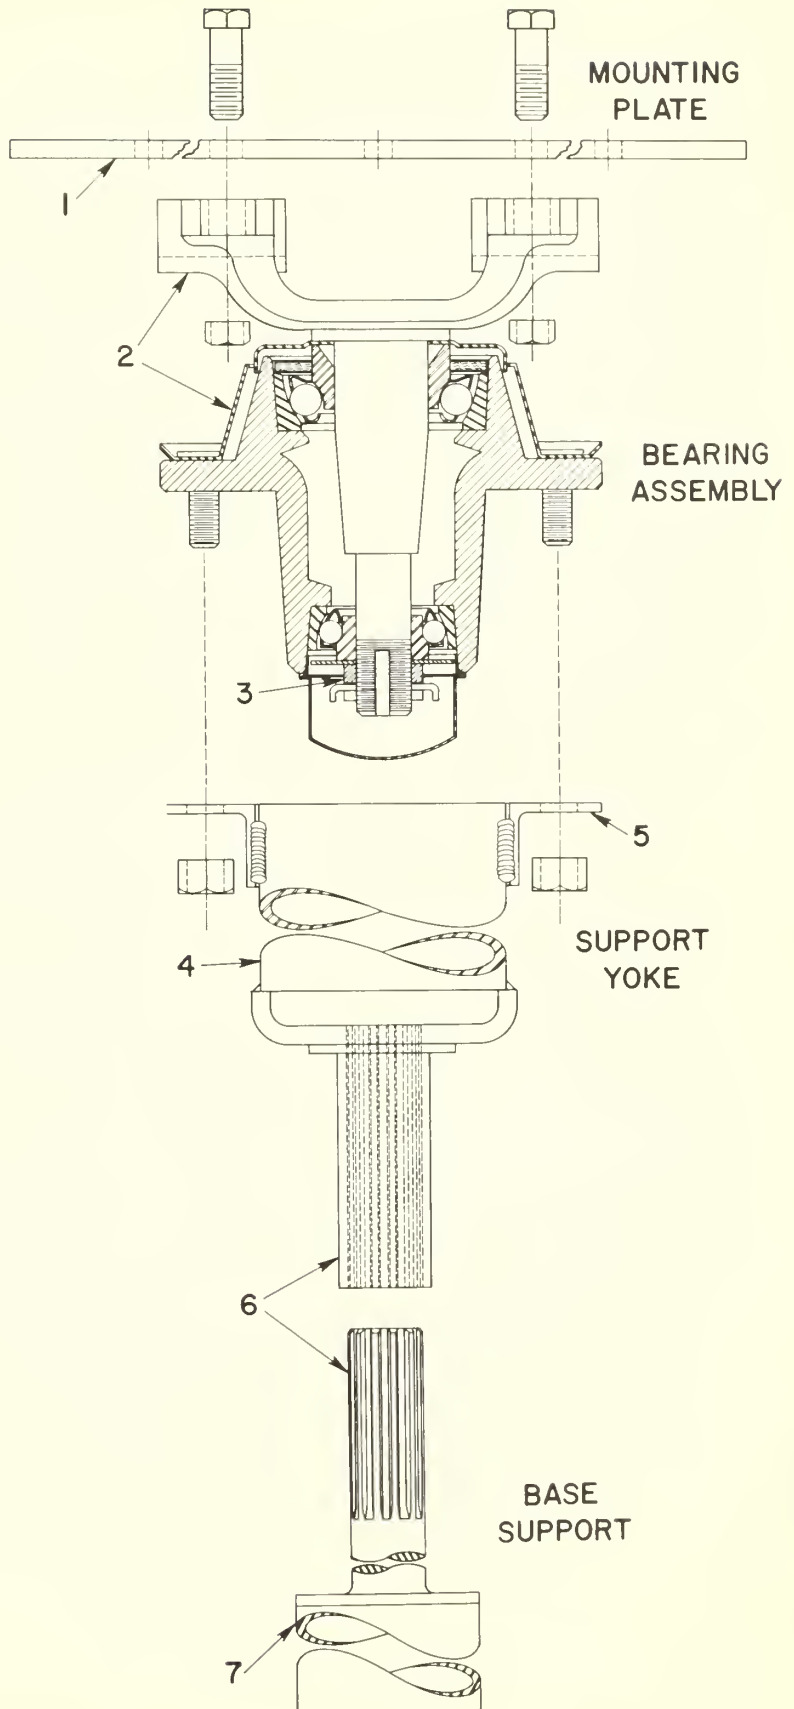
Rotating turntable which supports the blowing snow gage. The bearing assembly is fabricated from an automobile front wheel-bearing. The entire platform, with gage attached, can be lifted from the base support to permit servicing when the gage is installed in a pit.
